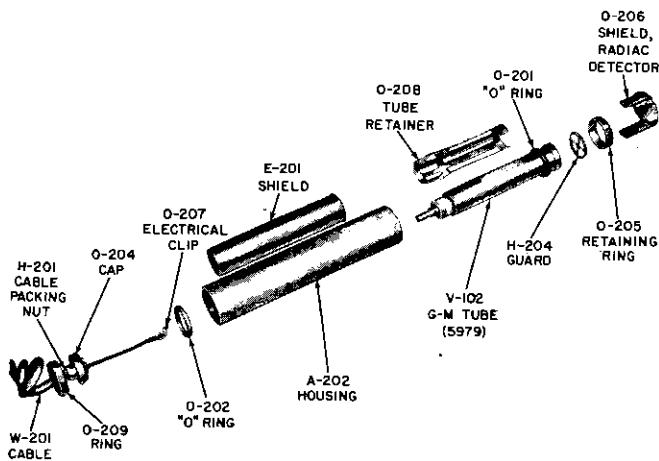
Radiac Detector DT-101/PDR-27F, Exploded View
